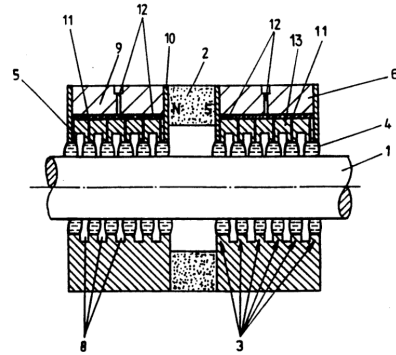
Ferrofluid seal for a shaft comprising several sealing gaps concentrically arrayed around a shaft [70].
